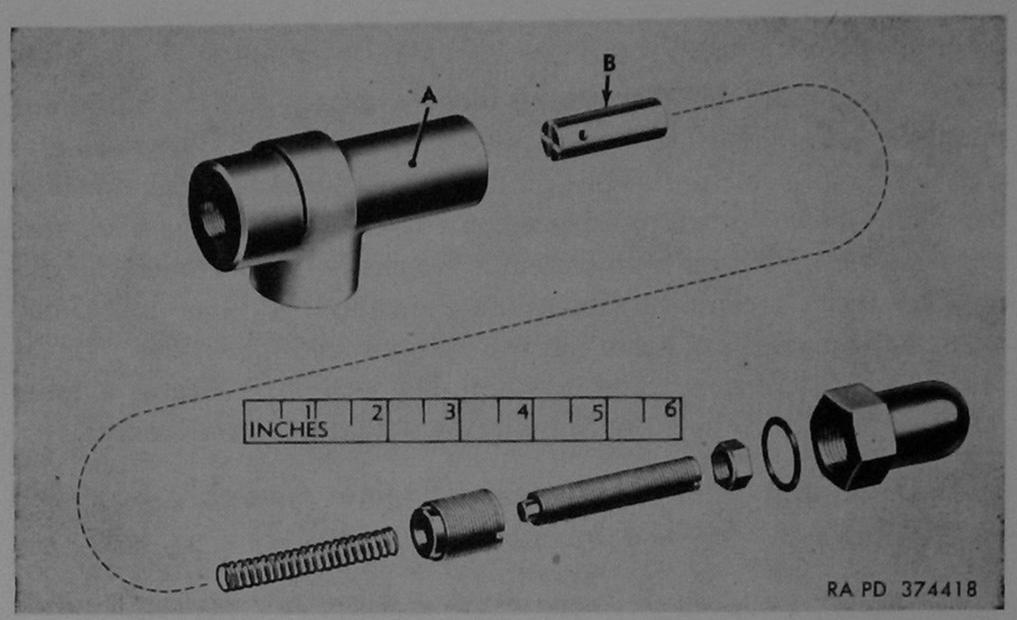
Repair and rebuild standard points of measurement for oil bypass valve (engine assembly-8726920 only).
